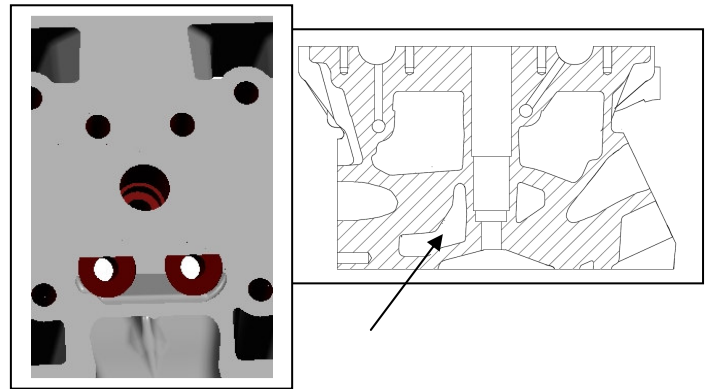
Cylinder Head Coolant jacket before design optimisation.
